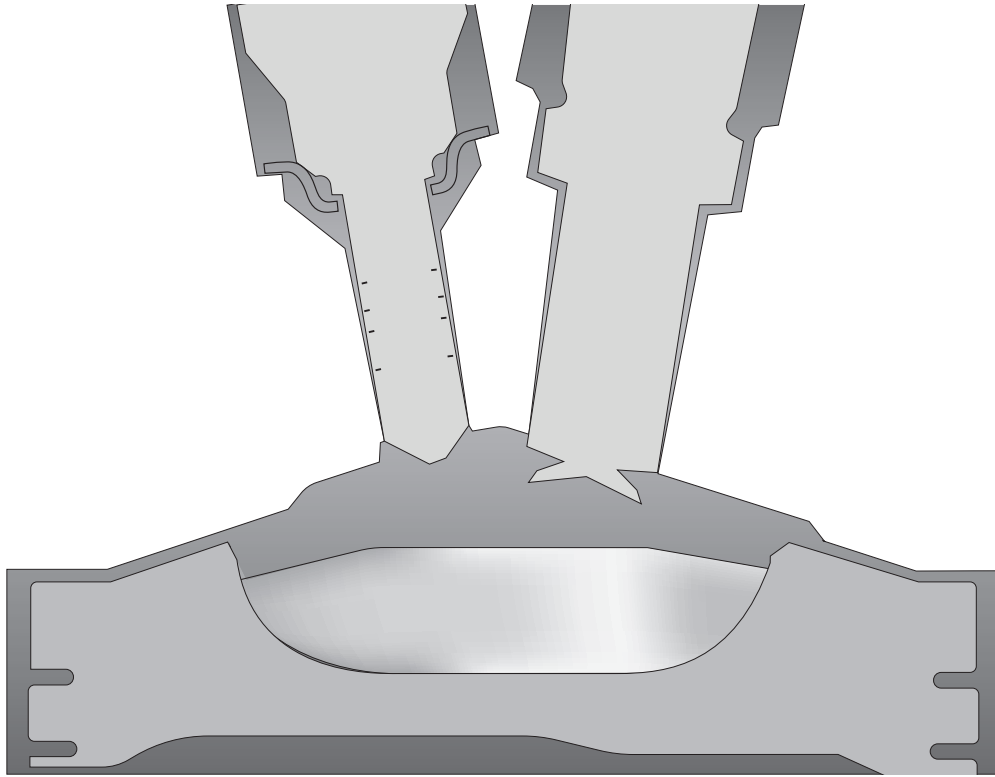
Representative cross section of piston / cylinder assembly through fuel injector (left) and four-pronged corona ignitor (right) adapted from Osborne et al. (2014) and King and Böcker (2013).
